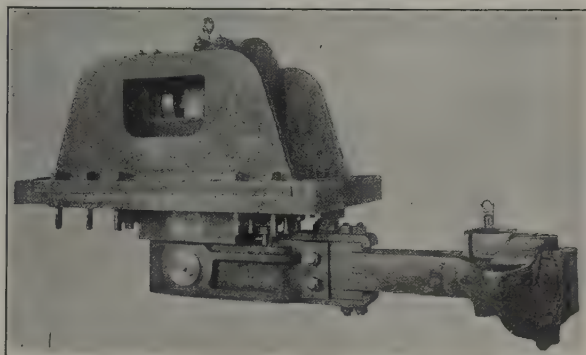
Drawbar and Weighing Head Assembly, Dynamometer Car.
